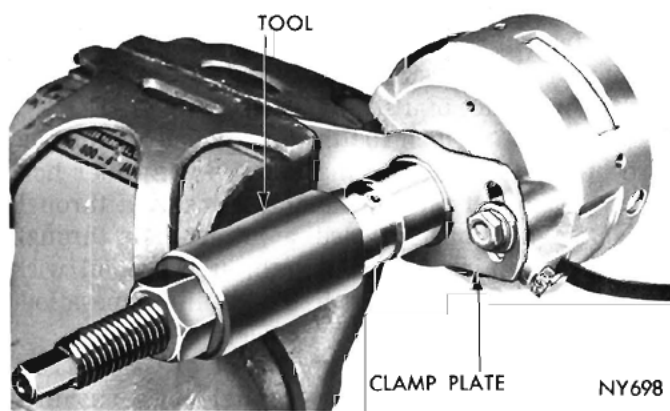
Removing Distributor Housing Lower Bushing (Typical)
